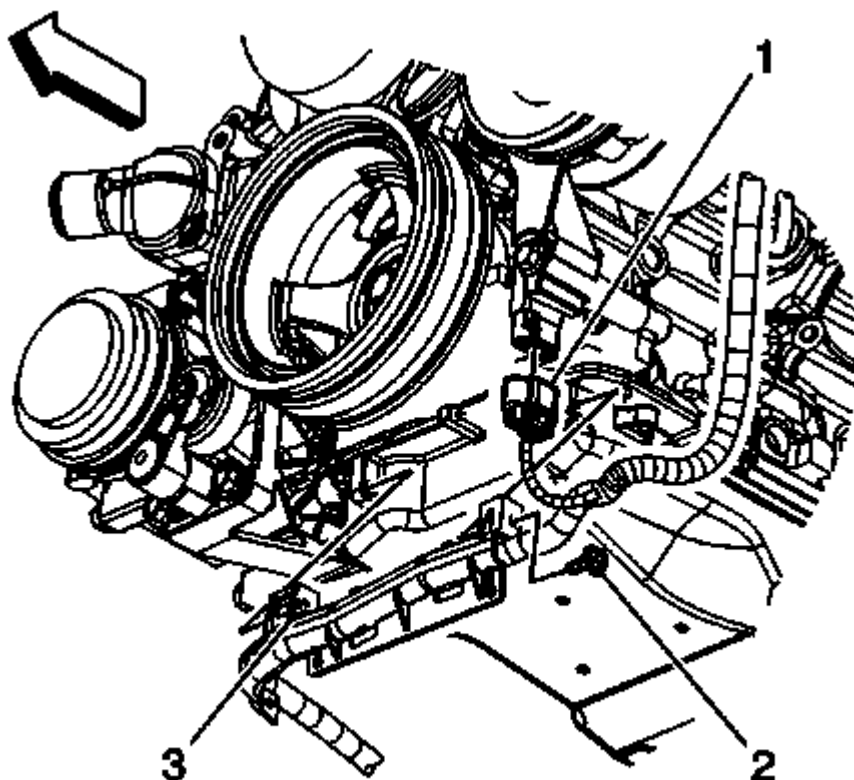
View Of Electrical Connector, Cable Channel Bolt & Pin
